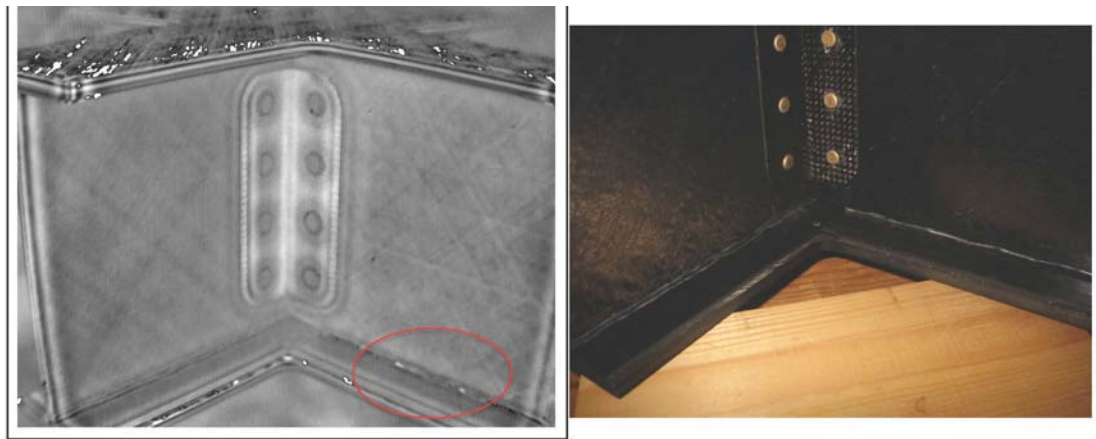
Thermal inspection results for cruciform 2, rivet 1 bottom.
